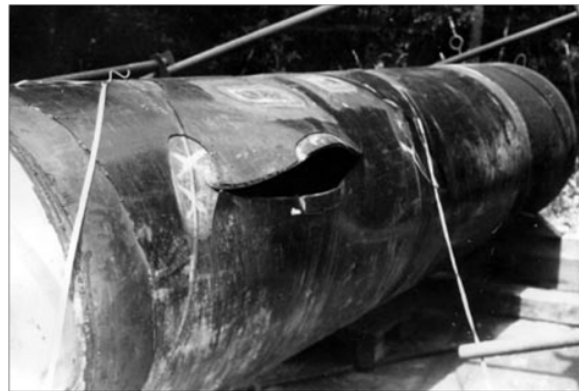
Burst initiated on the slit B with a fatigue crack
